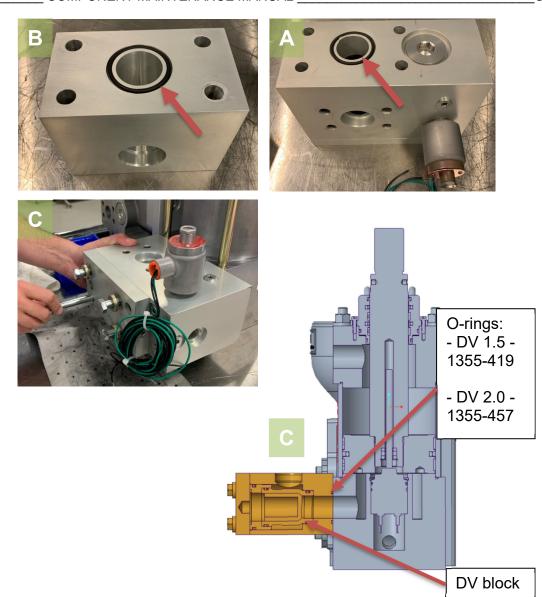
Install Dump Valve onto Cylinder, Fail Retract View, DV Block
